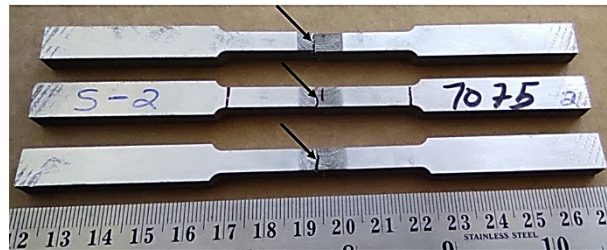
Tensile fractures of double-side friction stir welded joint of AA7075 (arrowhead shows failure location).
